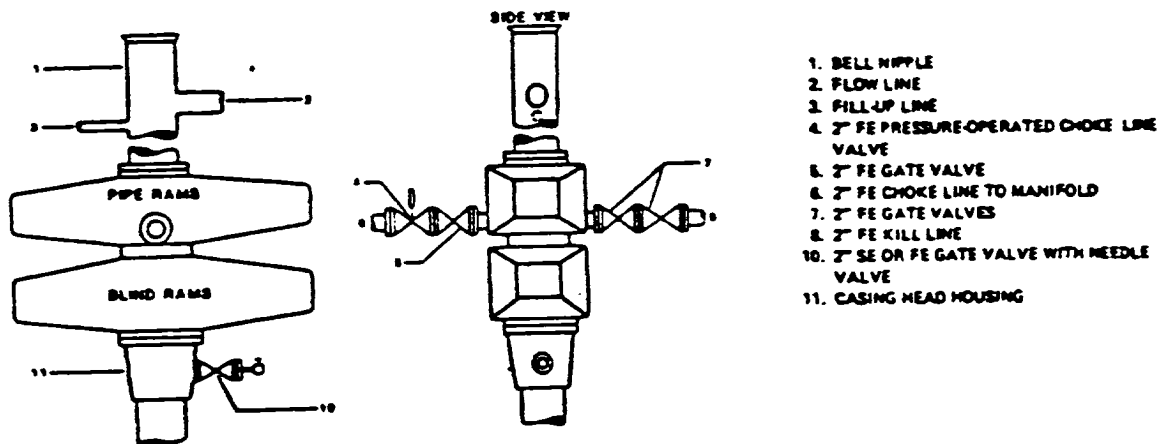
Standard Hydraulic Blowout Preventer Assembly
